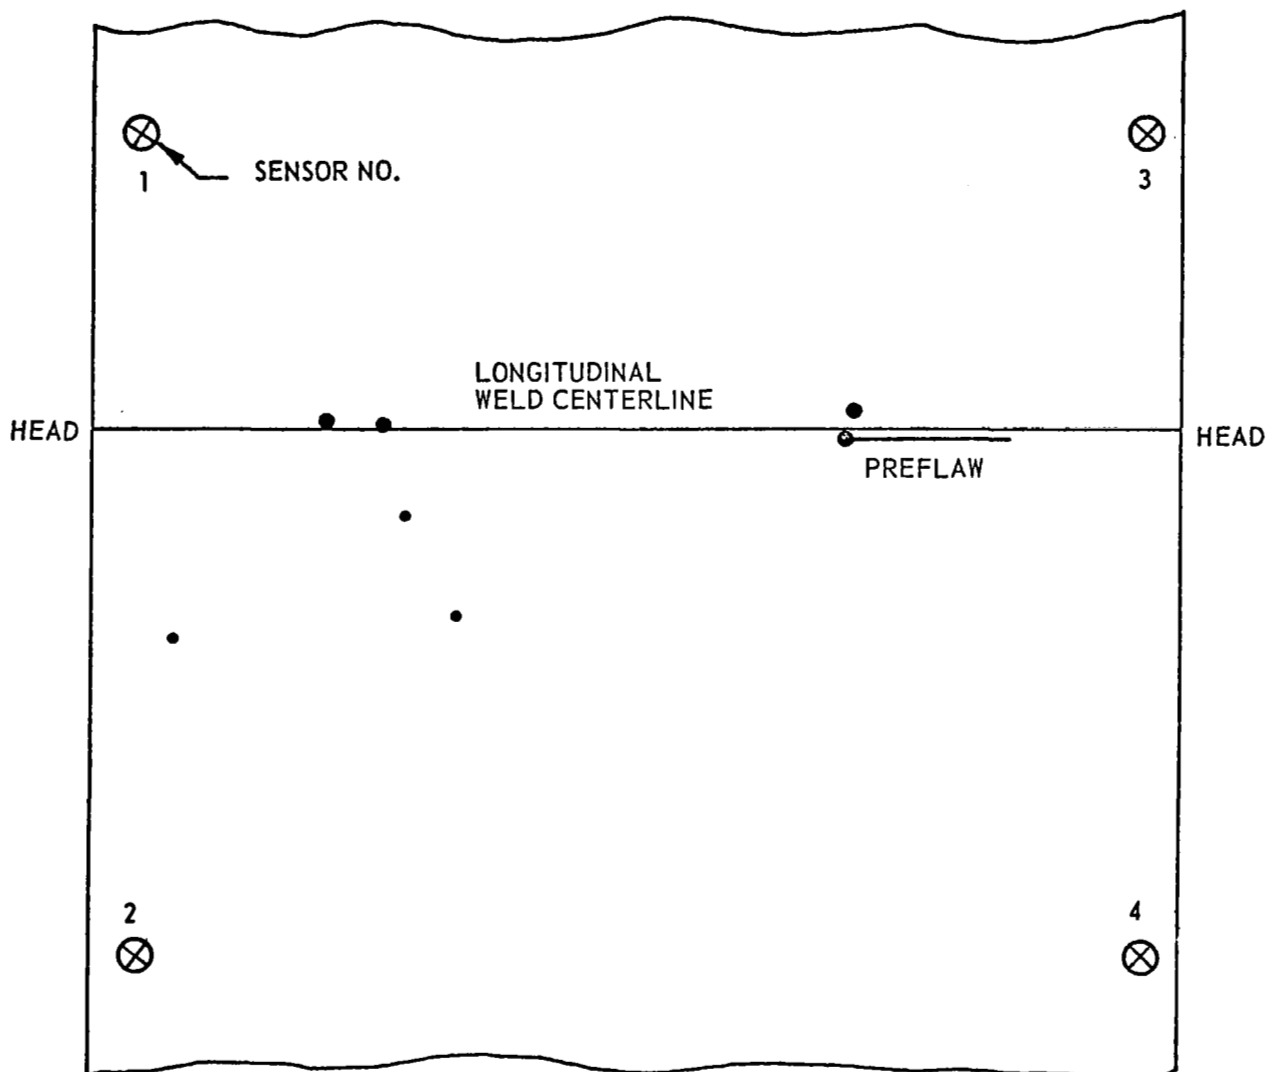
Location of SWE Sources Detected When Pressurizing (4th Cycle) the 2219-T87 Aluminum Vessel to 1000 psi at -320°F . Weld Preflaw Location also Shown.
